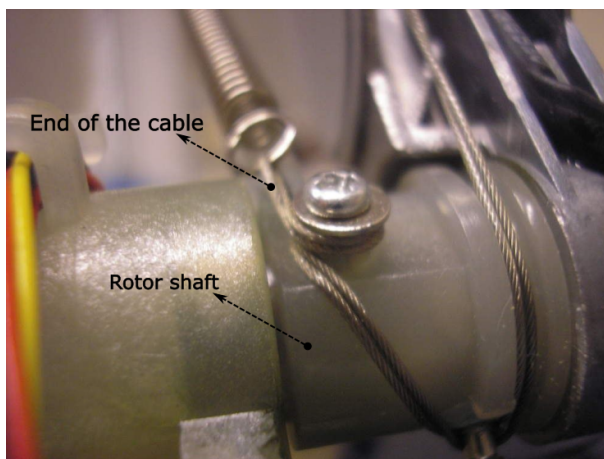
Internal parts of the Geomagic[®] Touch[™] (formerly PHANToM[®] Omni[®]) device*: connection of the cable and the rotor shaft.
